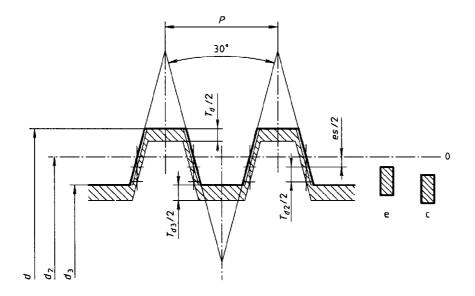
Bolt threads with tolerance positions c and e for the pitch diameter
